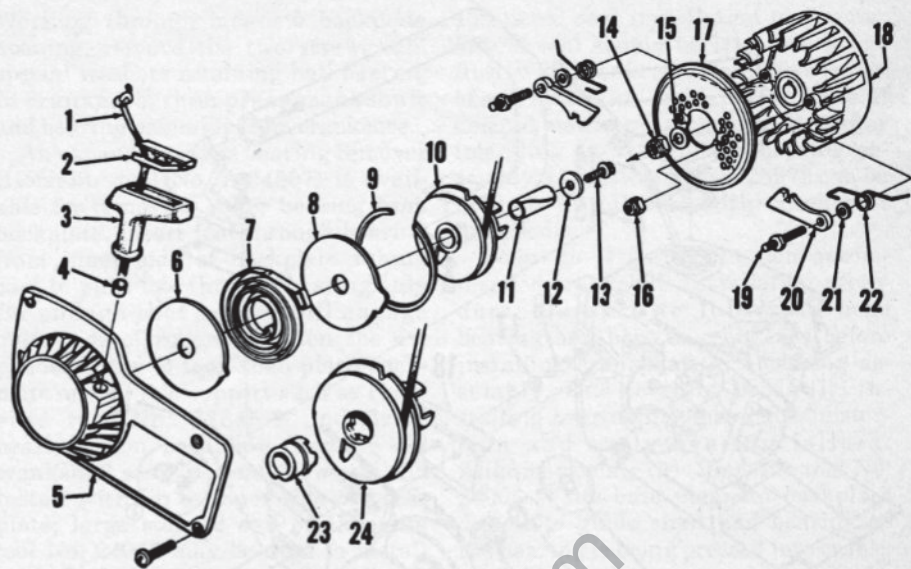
Exploded view of typical pawl type rewind starter used on early models. Refer also to Figs. HL120A, HL121 and 122. Late type rope pulley (24) and separate spring lock (23) can be installed if necessary to renew early type pulley (10) with integral lock. On models XL-103E and XL-104E, a stationary screen is attached to outside of housing (5) and rotating screen (17) is not used.
